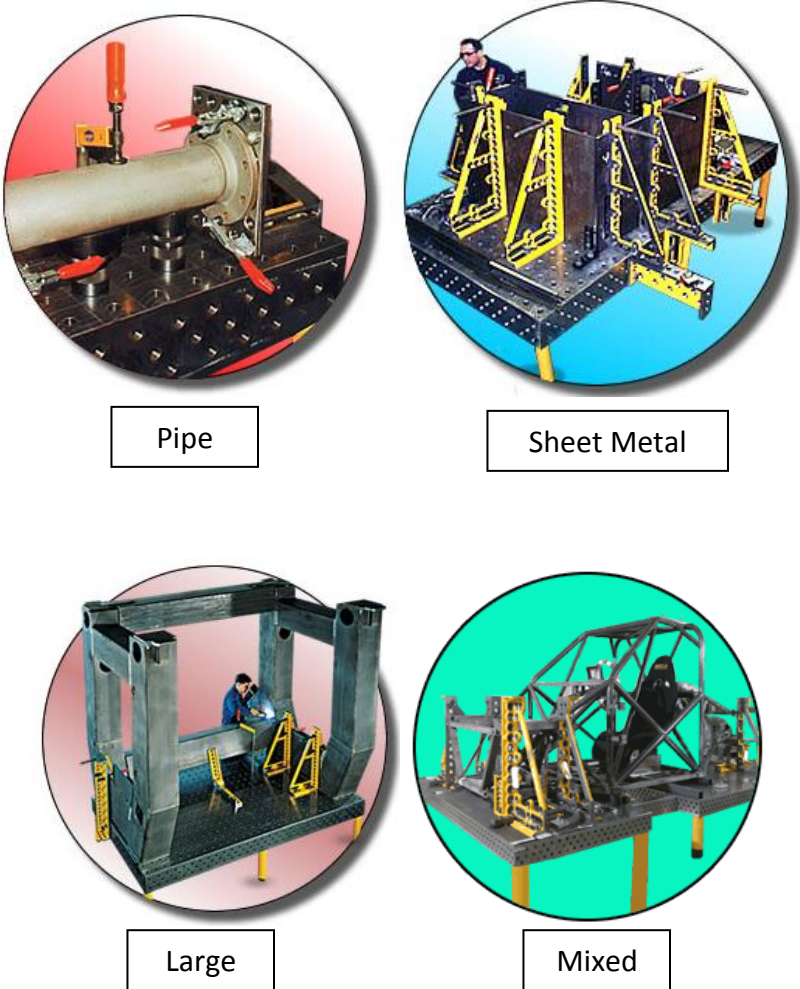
Varying fixture configurations for the four main types of workpieces (Bluco Co., 2008).
